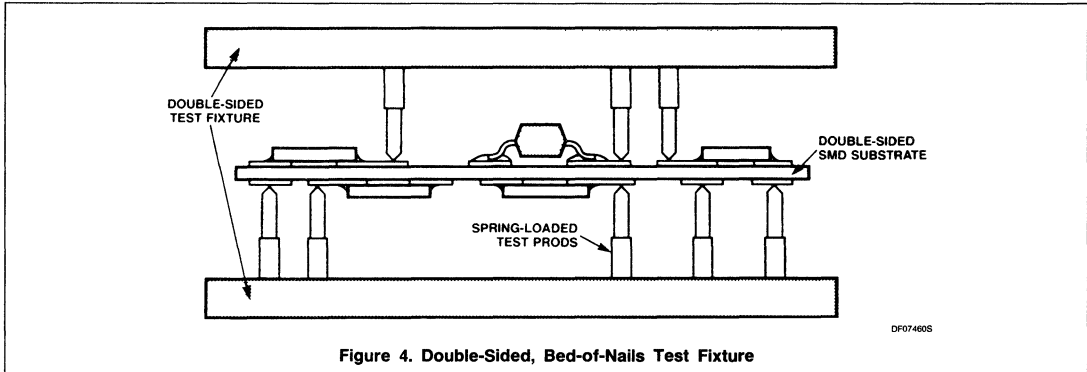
Double-Sided, Bed-of-Nails Test Fixture
